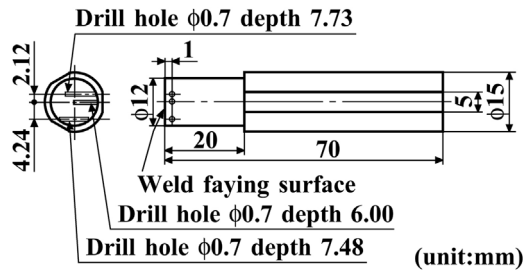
Shape and dimensions of friction welding specimen of 304SS for measuring temperature change at weld interface.
